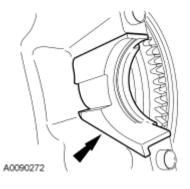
Identifying Starter Motor Isolator Courtesy of FORD MOTOR CO.
